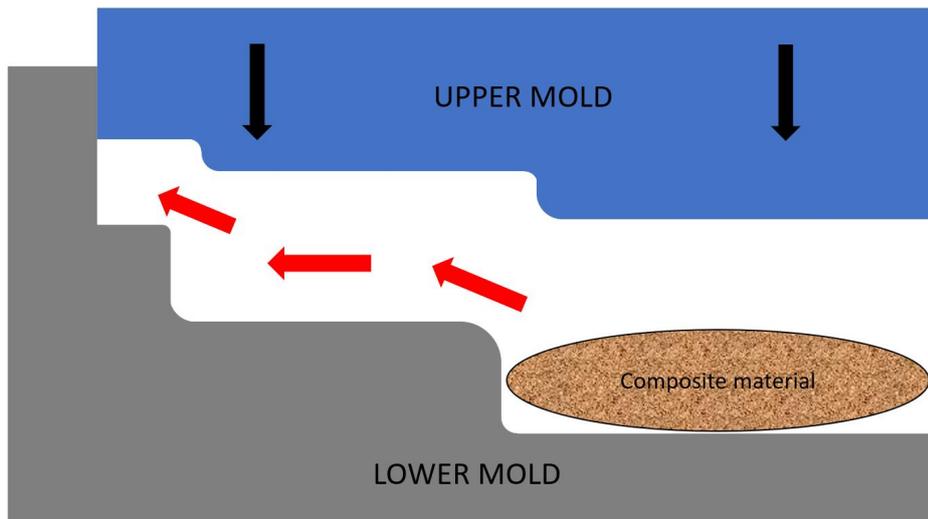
Cross-section view of the upper and lower mold showcasing curved edges.
